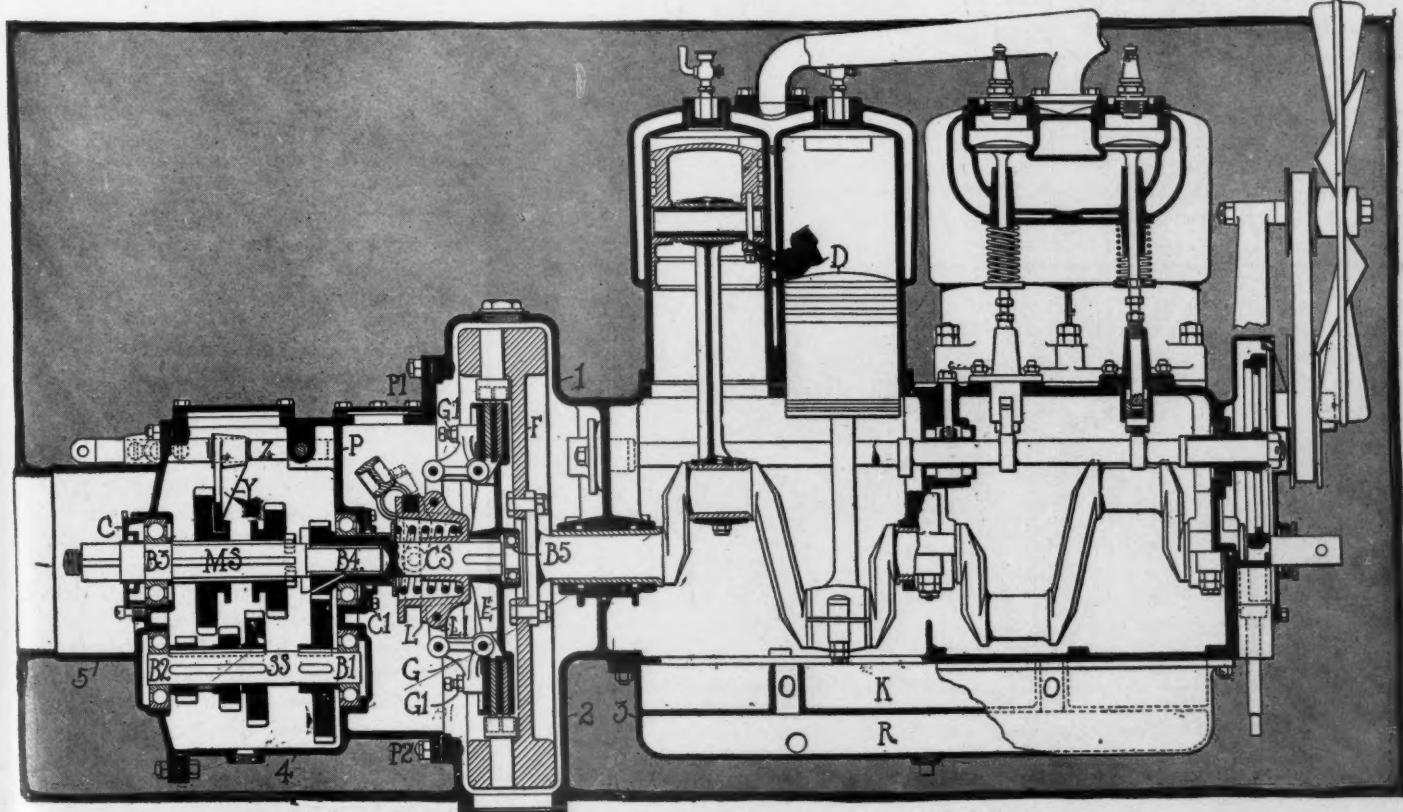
VERTICAL SECTION OF OHIO MOTOR, CLUTCH AND GEARBOX SHOWING HOW BALL BEARINGS IN GEARSET ARE MOUNTED TO AVOID OIL LEAKS
